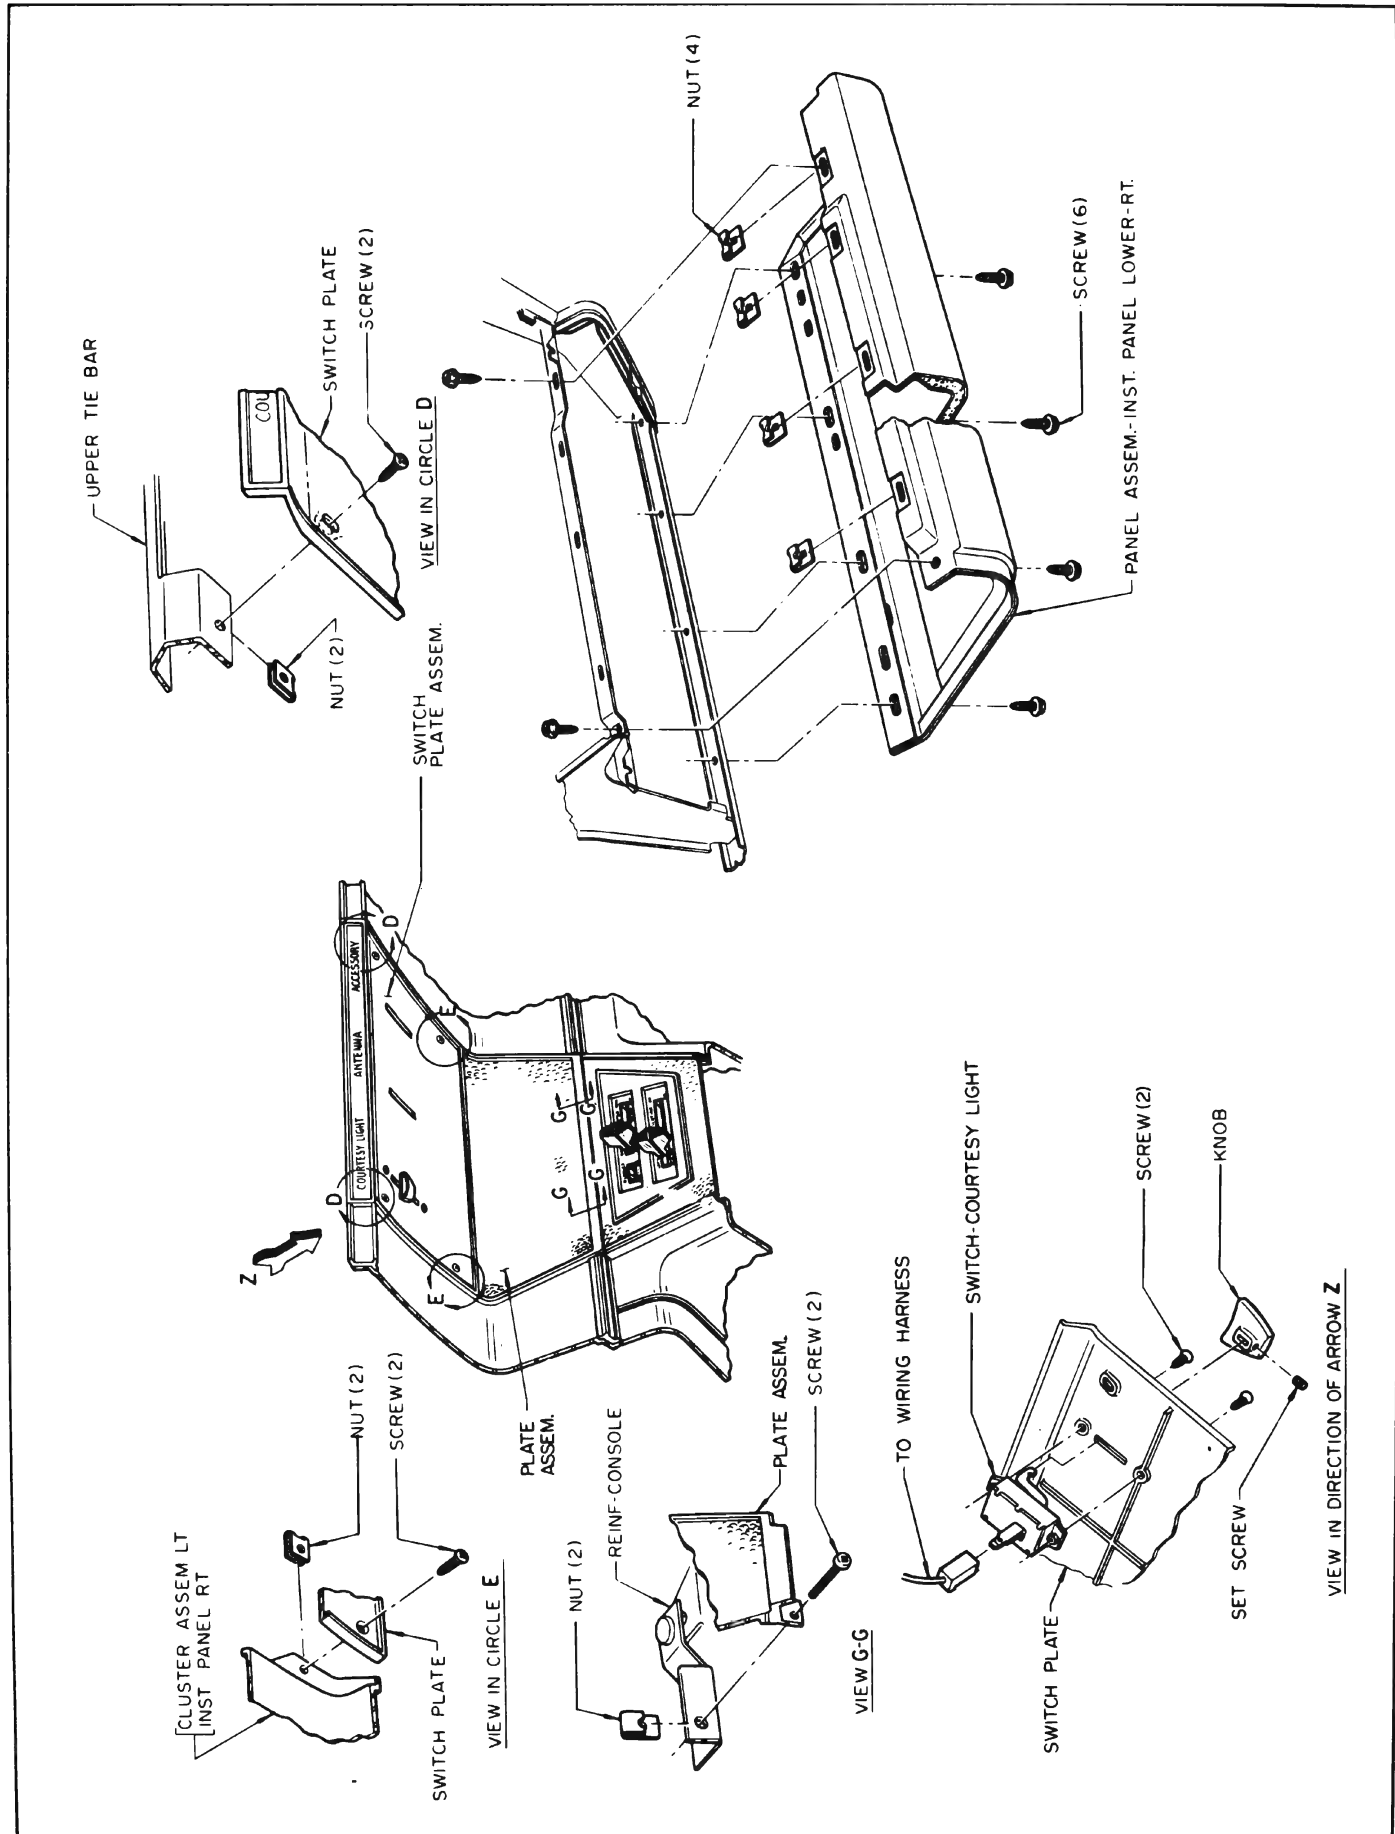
Center and Right Lower Instrument Panel Installation - Riviera
